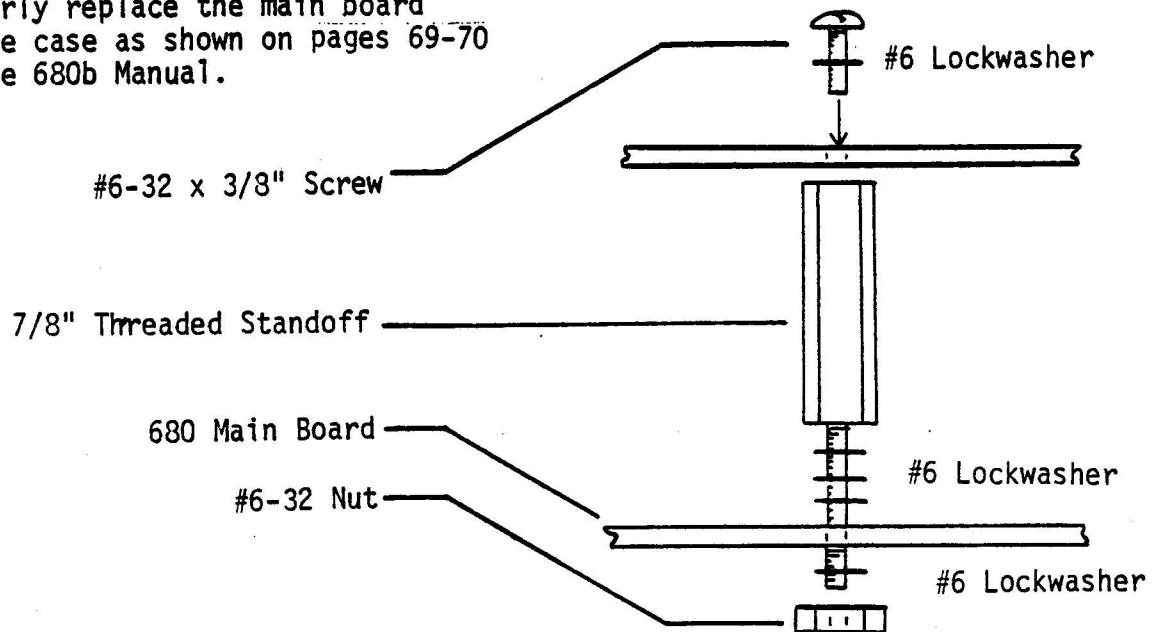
Installation of Threaded Standoffs onto 680b Main Board
